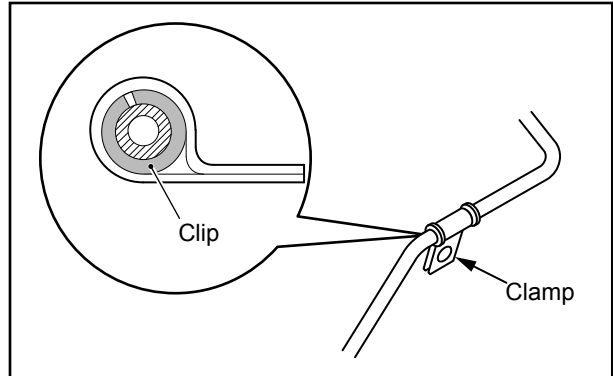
Oil Pipe and Clip - Inspect and Replace
